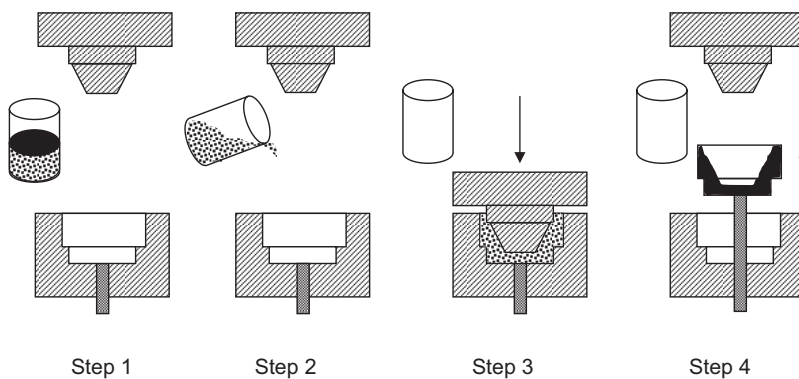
The concept of direct squeeze casting: step 1—alloy melting; step 2—die filling; step 3—closing die and applying pressure; step 4—part ejection
